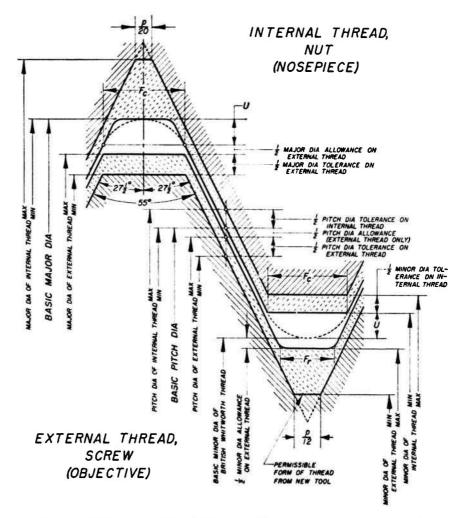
Disposition of tolerances, allowances, and crest clearances for 0.800—36 AMO thread.
